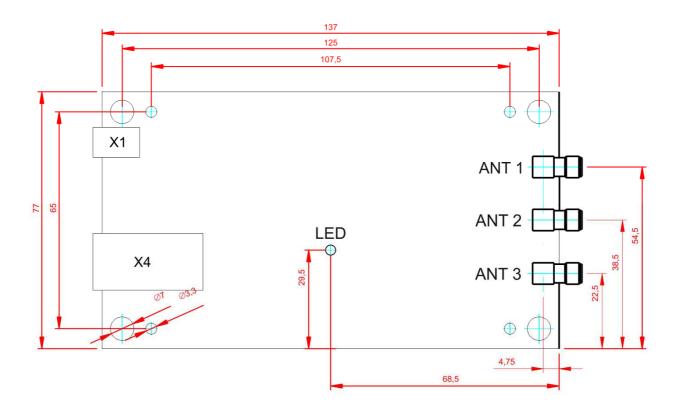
Dimensions ID ISC.MRMU102-POE (all dimensions in mm)
